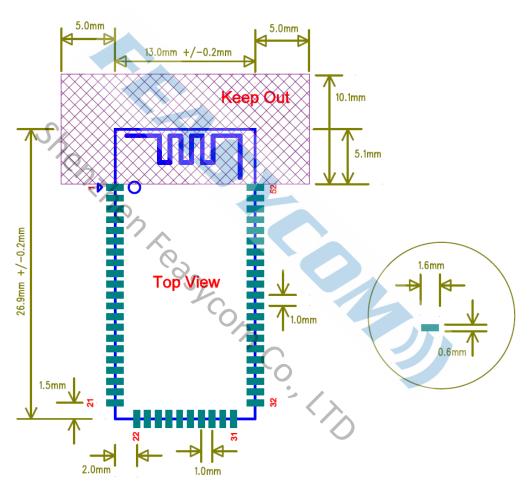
FSC-BT936E footprint Layout Guide (Top View)
